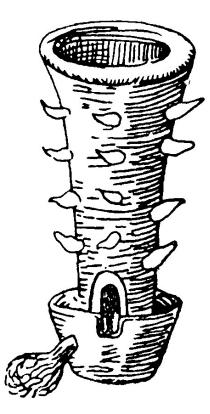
Huaira or casting furnace. Drawing after Barba 1929
